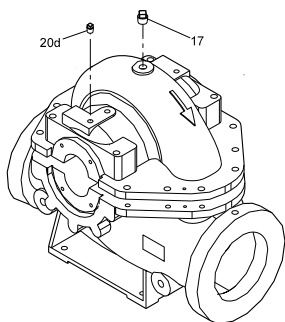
Position of the vent valve and plug for shaft seal flushing
